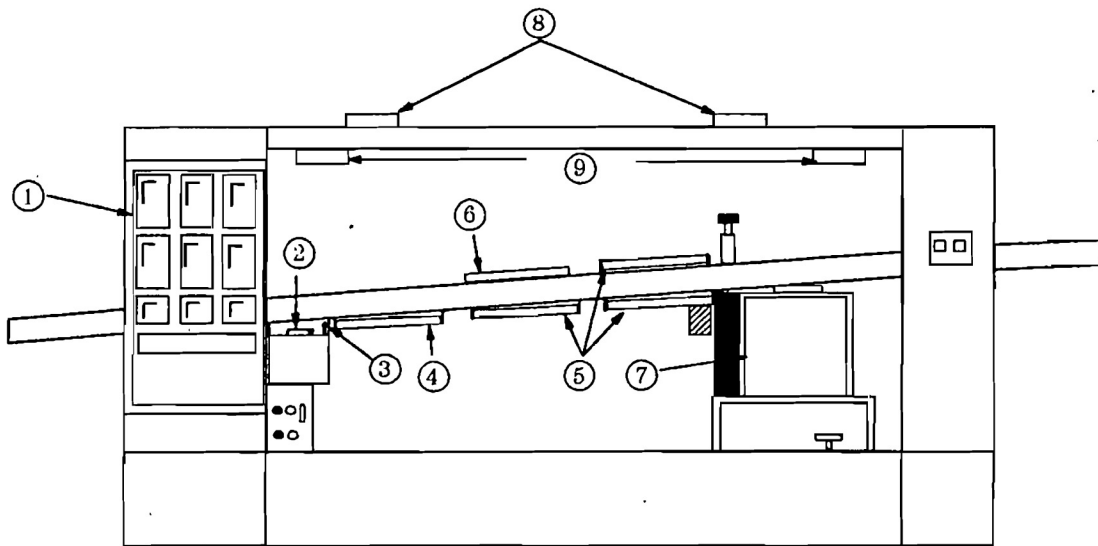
Wave solder machine overview: 1: control panel; 2: flux tank; 3: air knife; 4: dip tray; 5: preheaters; 6: reflector; 7: solder bath; 8: exhaust stacks; 9: hood lights.
